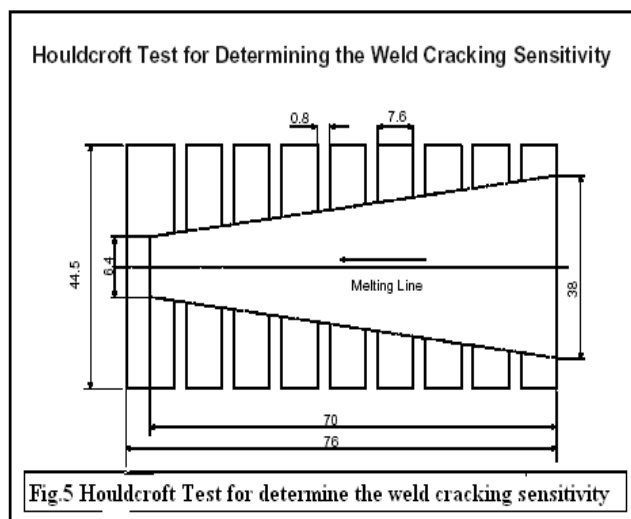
Houldcroft Test for determine the weld cracking sensitivity
